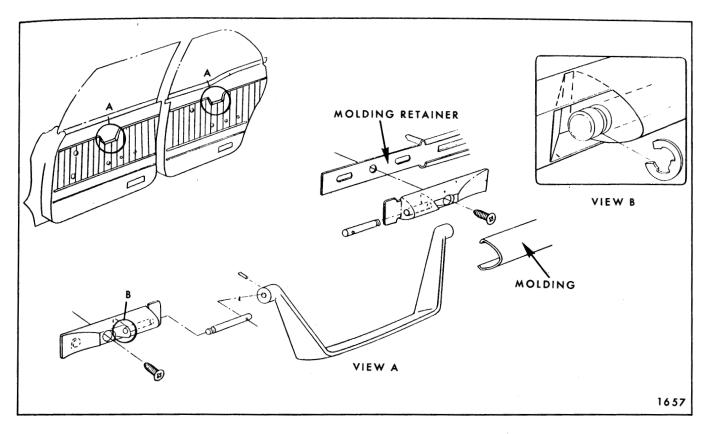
Door Pull Handle Installation - 26239 Style
